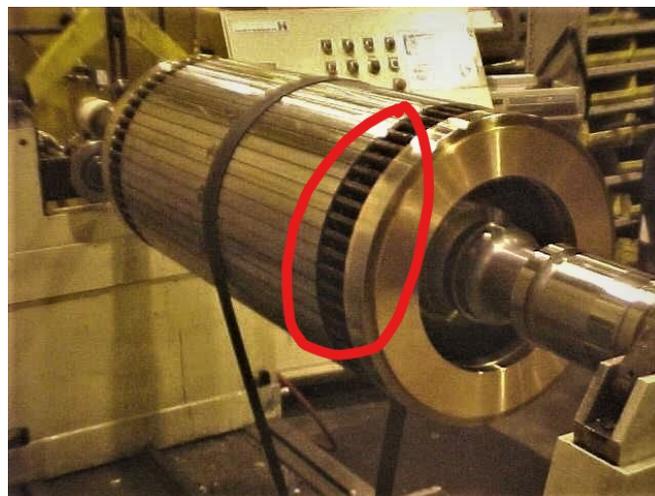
Typical induction motor rotor with fabricated copper bar cage. (Courtesy of ABB.) Failures, which are not shown, occurred at or near the bar to end ring interface identified by the elliptical marking.
